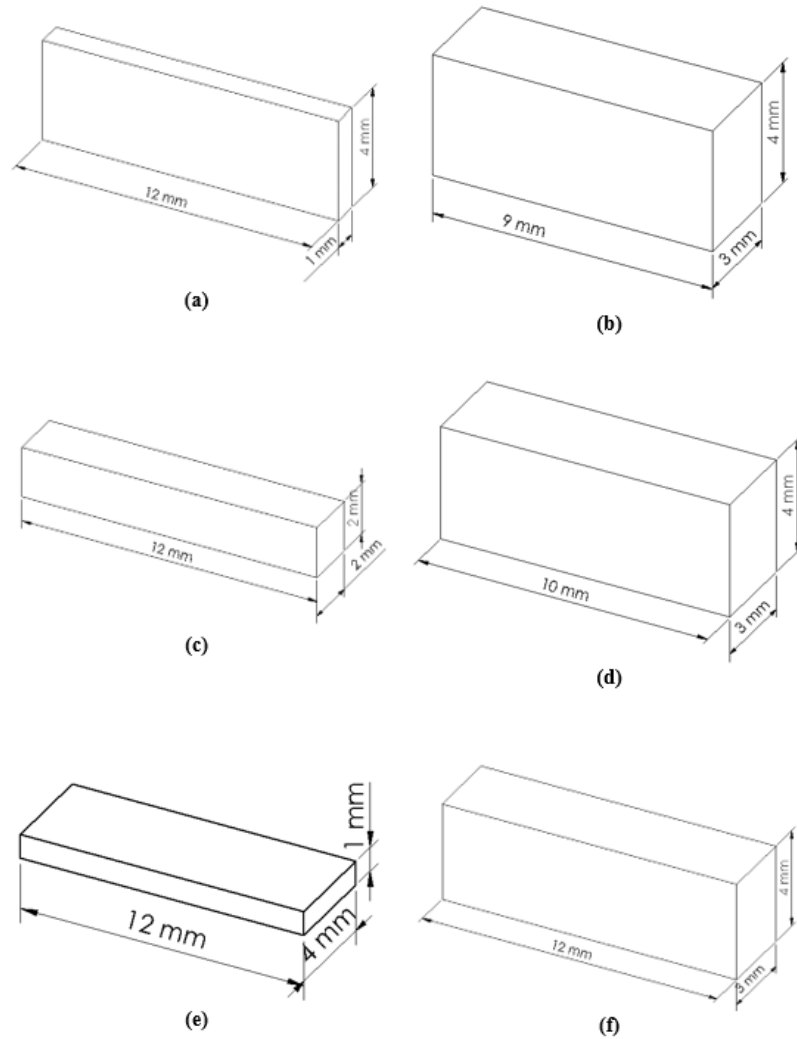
Dimensions of the propped cantilever beam and fixed beam (a) propped cantilever beam type 2.1, (b) fixed beam type 2.1, (c) propped cantilever beam type 2.2, (d) fixed beam type 2.2, (e) propped cantilever beam type 2.1, and (f) fixed beam type 2.1
